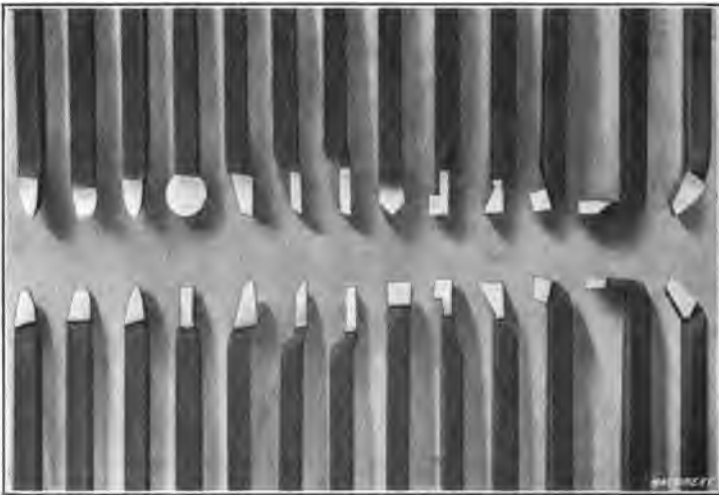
Set of Planer Tools Ground on Sellers Tool-grinding Machine
